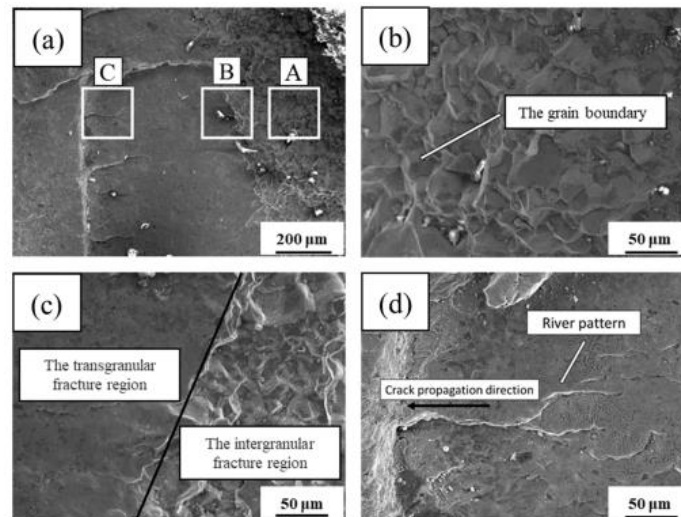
SEM showing the fracture surface of the piston, a) The overall fracture surface, b) The inter granular fracture surface (region A), b) The boundary between inter granular fracture and trans granular fracture (region B), d) The trans granular fracture surface (region C)
